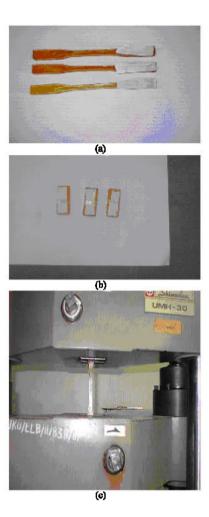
The tensil and bending test samples (a) and (b) and the tensil samples under loading in the universal testing machine, (c)
